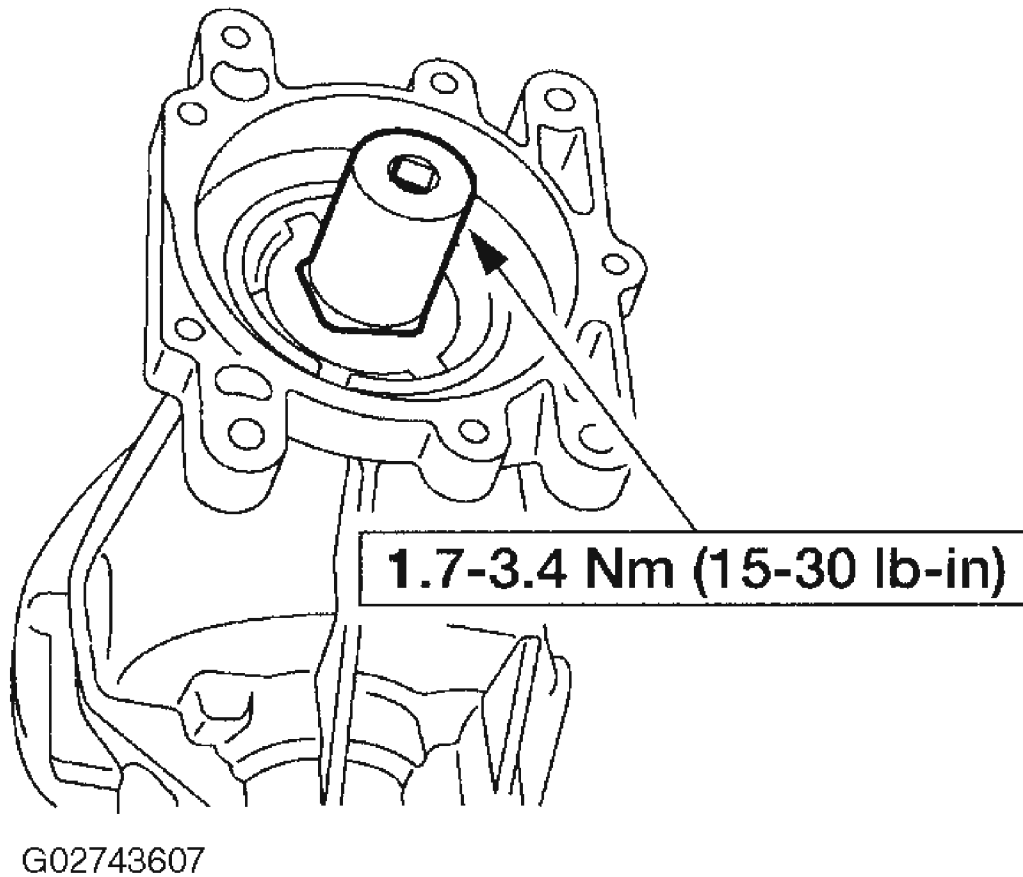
Installing Drive Pinion And Drive Pinion Nut
